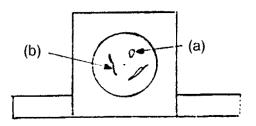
CRACKS AND SCRATCHES IN PLATING
